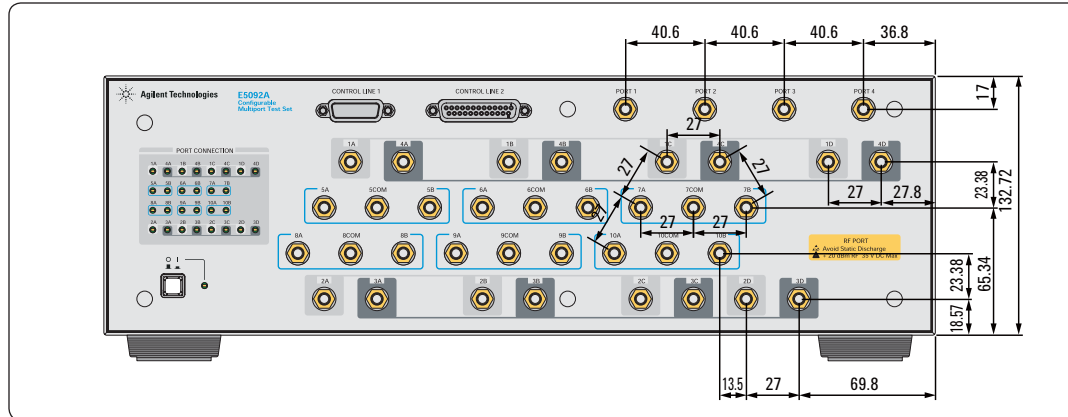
Dimensions (front view, with Option E5092A-020, in millimeters, nominal)
